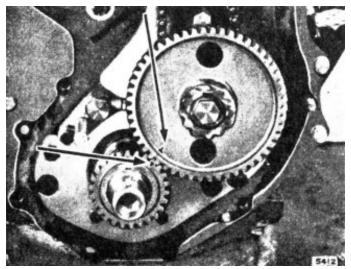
When replacing the timing gears the 'T' markings must be in line as shown
